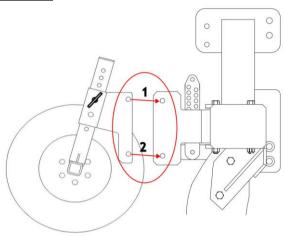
Installation of the support wheel assembly to the brackets in the MGP subsoiler frame
